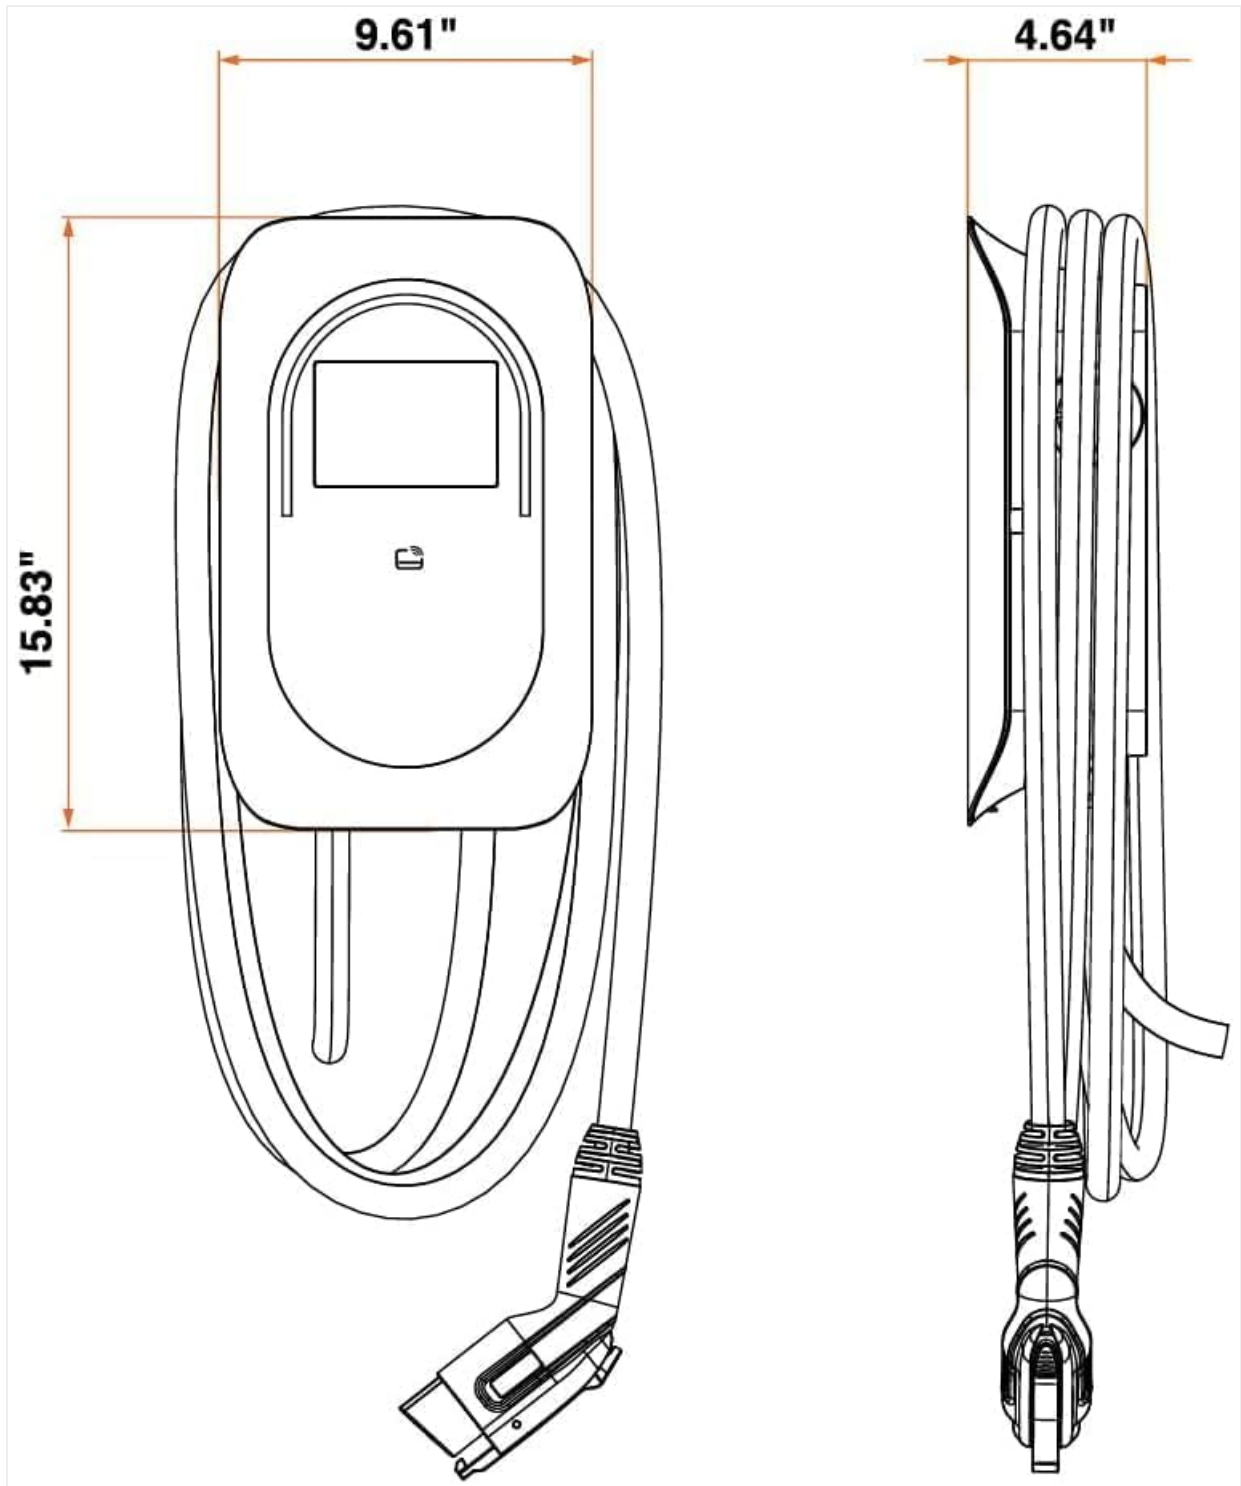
Dimensional drawing of the charger, indicating height, width, and depth.
